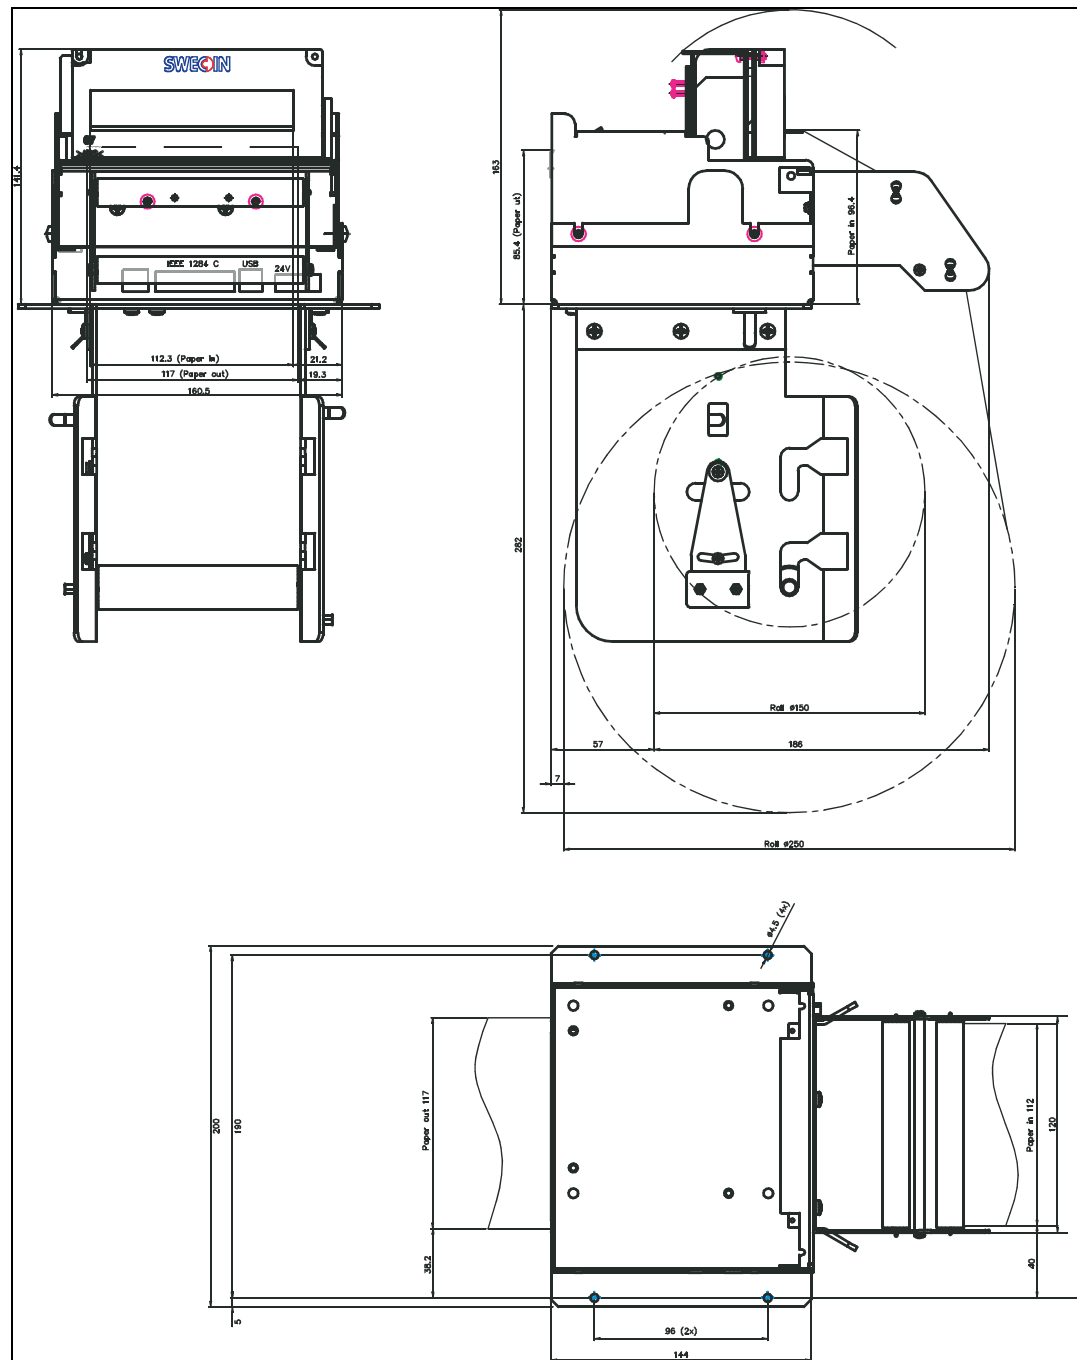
Roll holder for paper placed under printer. The roll can be fitted on two different levels, one for 150-mm roll, and one for 250-mm roll. This way, minimal space is required under the printer.
